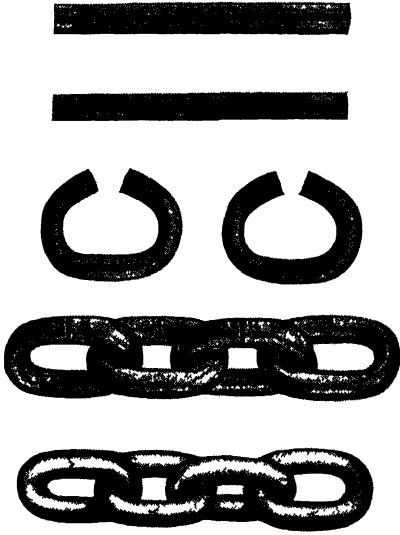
Welded Oval-Link Hoist Chain.
